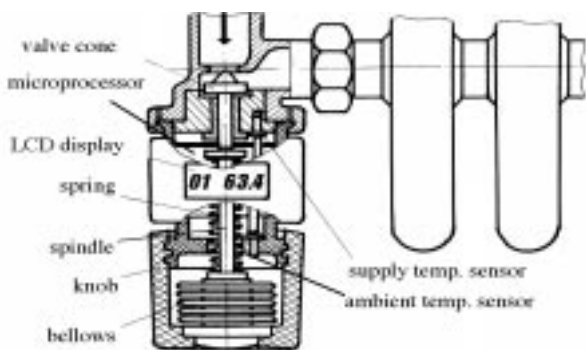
Possible configurations for HCA-TCLs: HCA-TCL built inside a thermostatic radiator valve (TRV)
